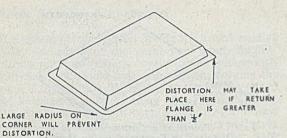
Flanged Door-panel, illustrating the Importance of Radii at the Corners.
